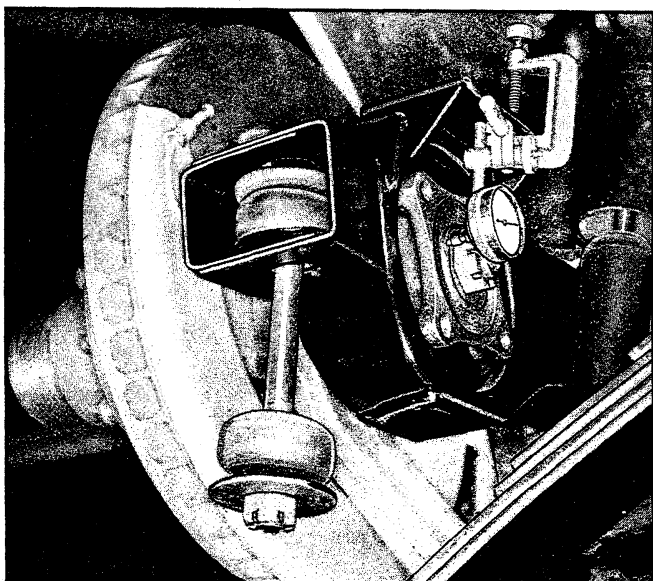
Checking Wheel Bearing Adjustment (Corvette)
